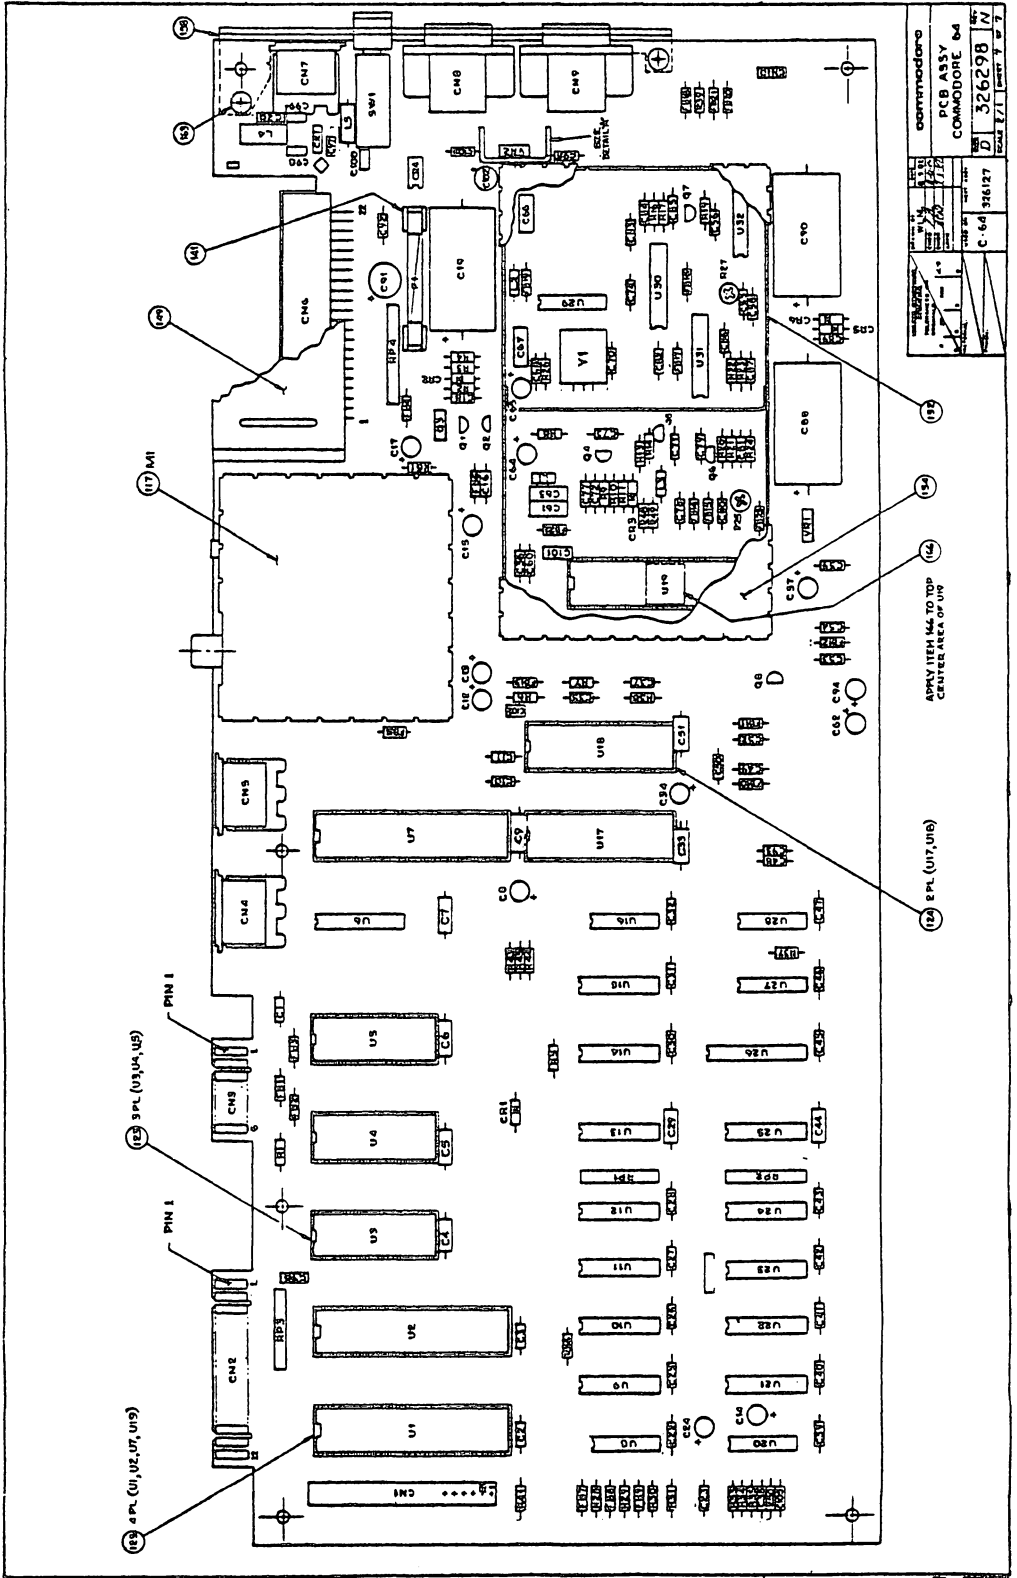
Printed circuit board assembly for the Commodore 64 (Reproduced by courtesy of Commodore Business Machines (UK) Ltd).
